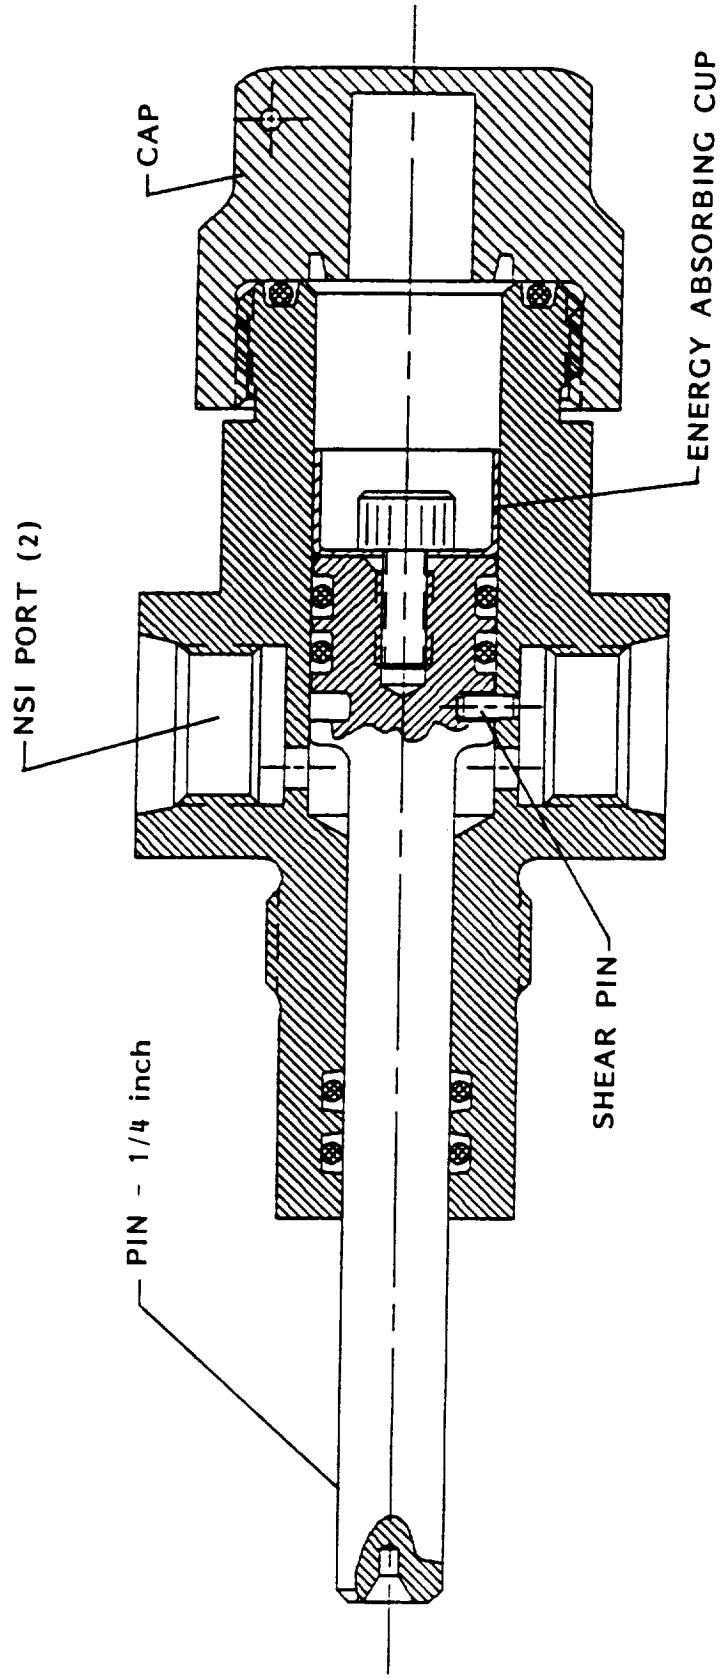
Cross sectional view of steel-bodied HALOE pin puller.
